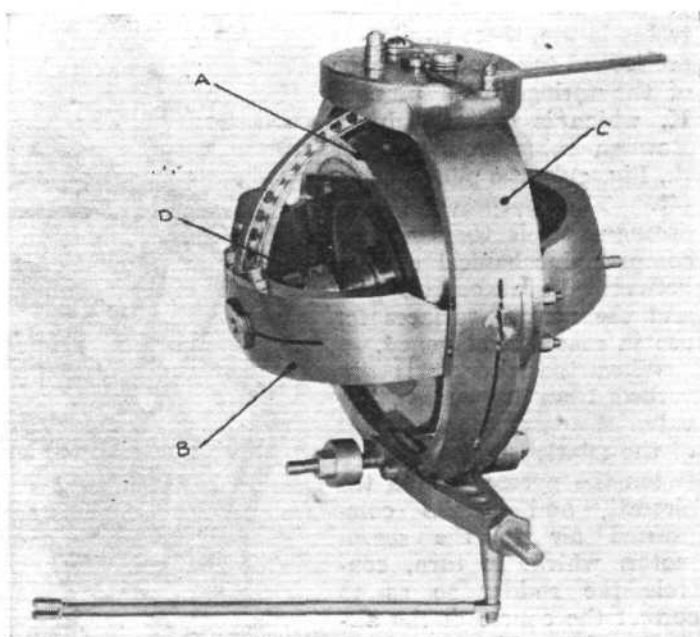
View of Gyroscope dismounted, showing inner and outer Gimbal Rings.
